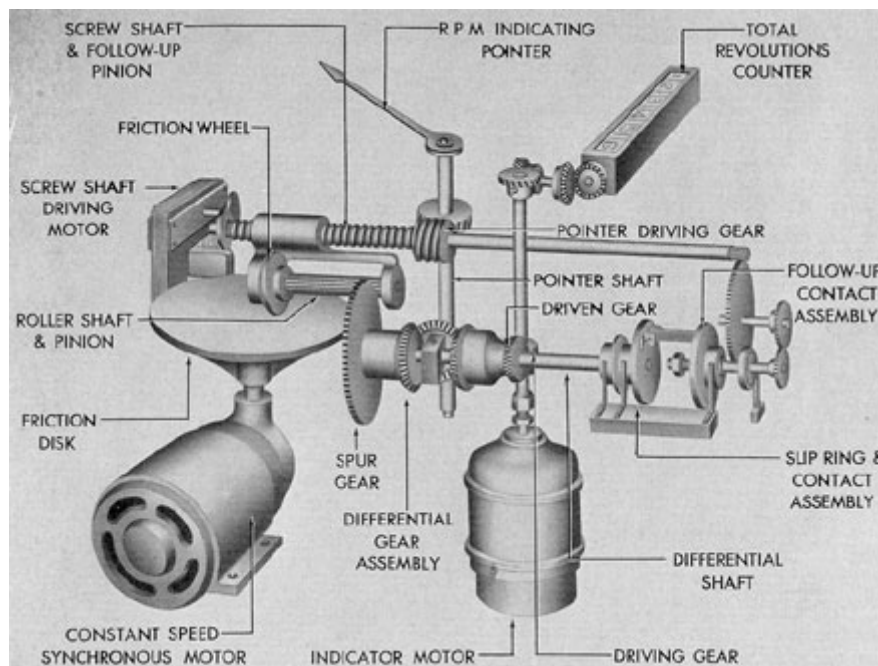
Schematic arrangement of Pitometer log type propeller shaft revolution indicator and counter system.
